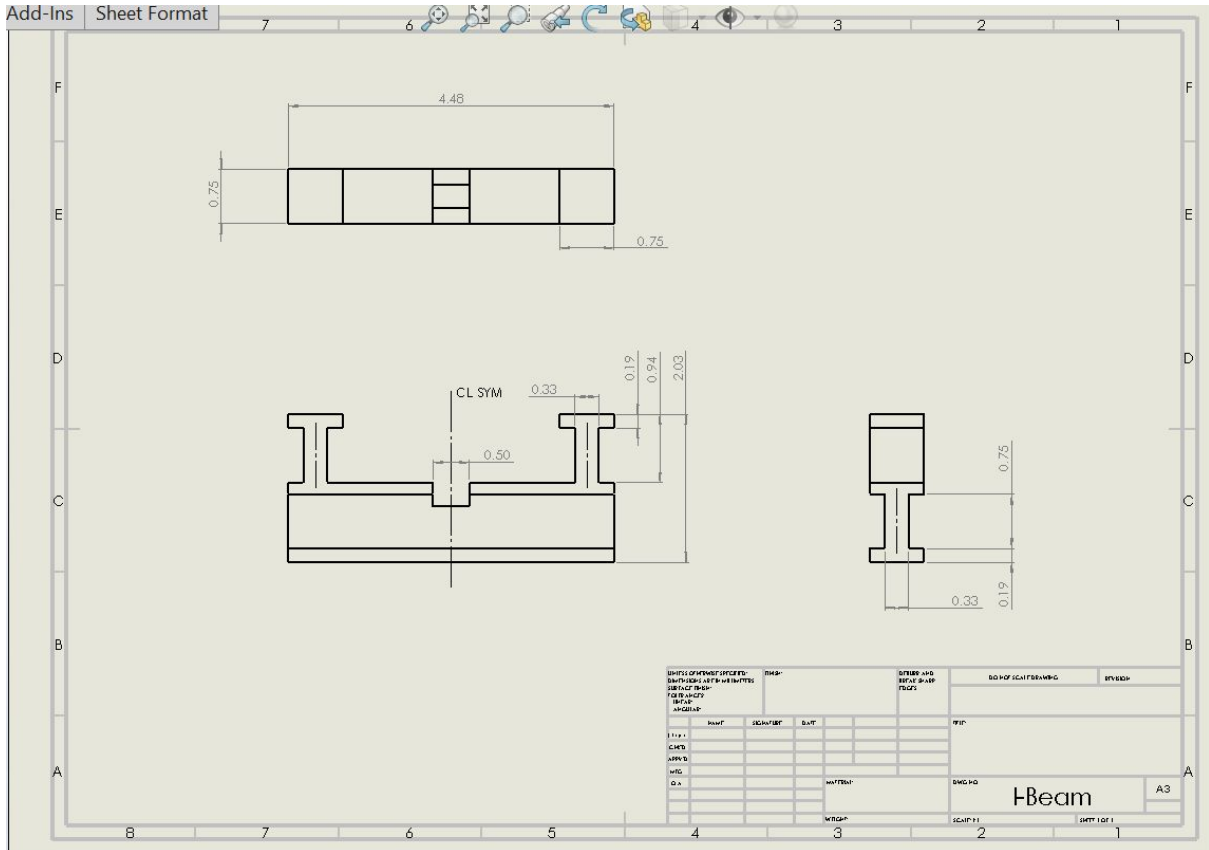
Preliminary Design I-Beam Detail Drawing
